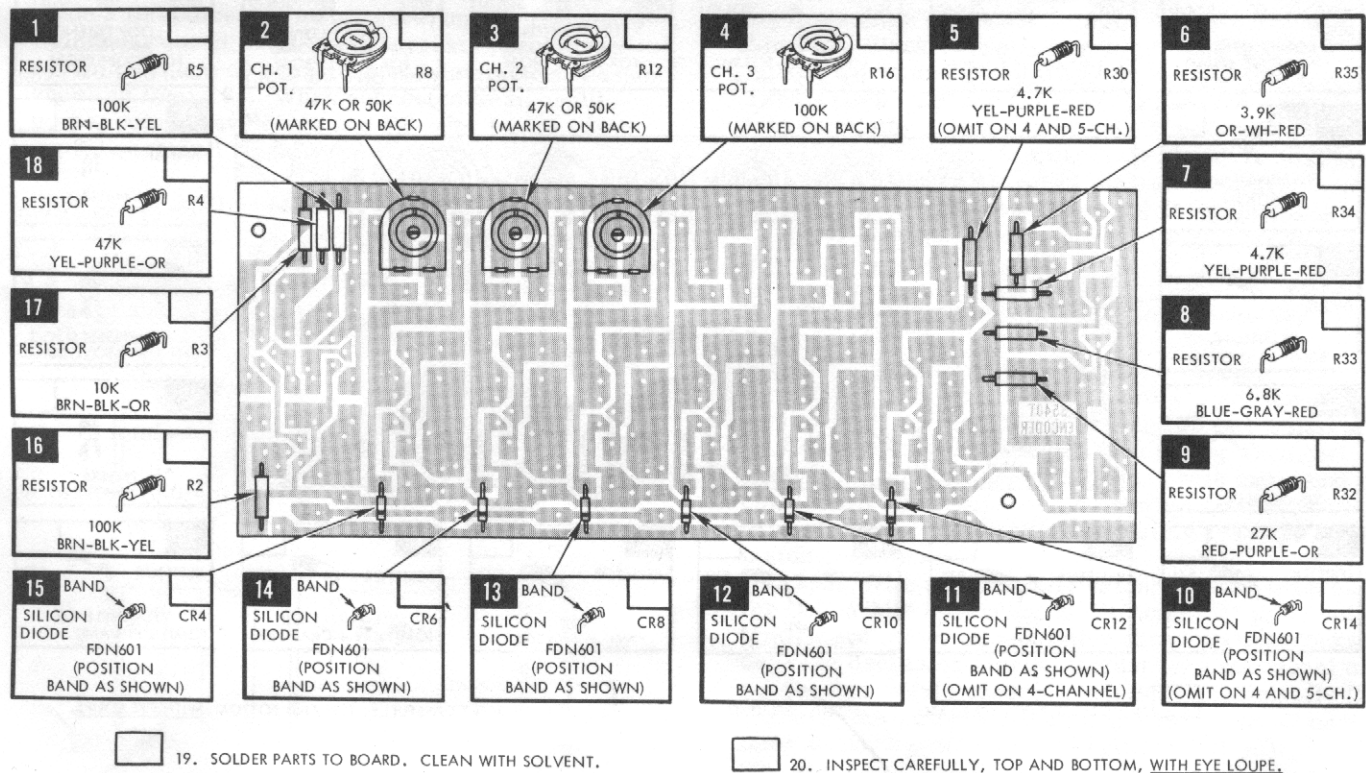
Logic Board Assembly (Sheet 1 of 6)
